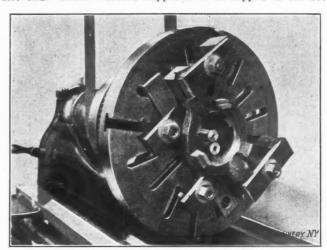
Use of Central Plug and Ring Gage for Sizing Projections located 120 Degrees apart
